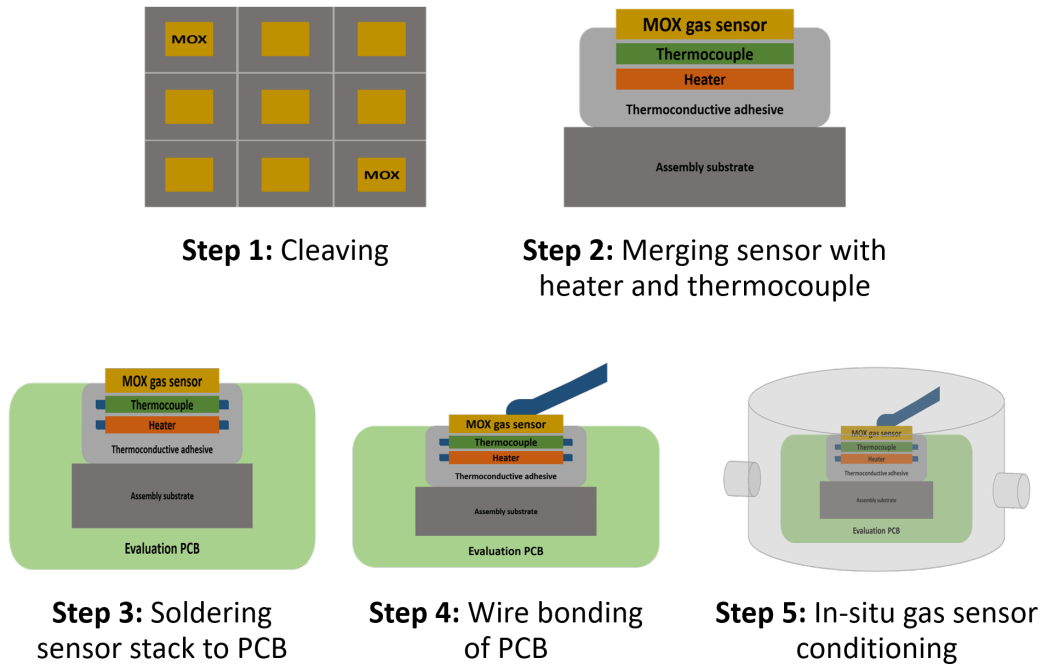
The five process steps of gas sensor assembly and conditioning.
